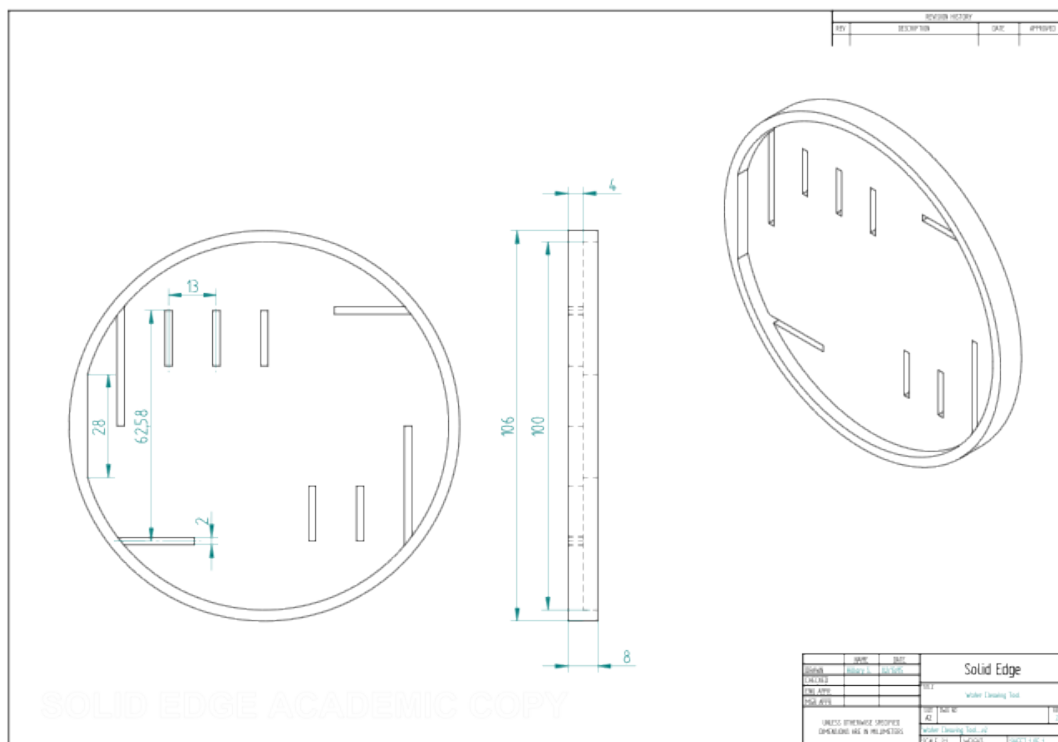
Draft of the cleaving tool designed for fracturing wafers along lines parallel and perpendicular to the flat notch along the inner diameter of the tool to create devices of a consistent size.
